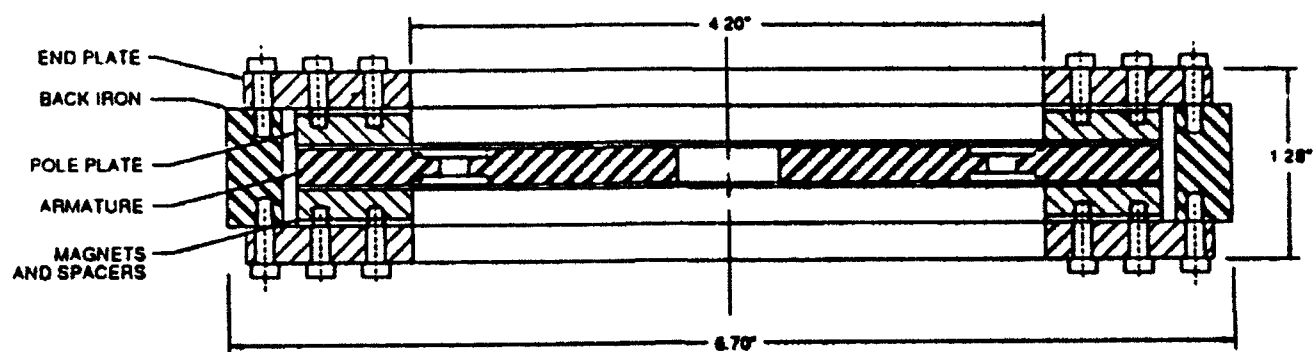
Passive Radial Magnetic Bearing Assembly
